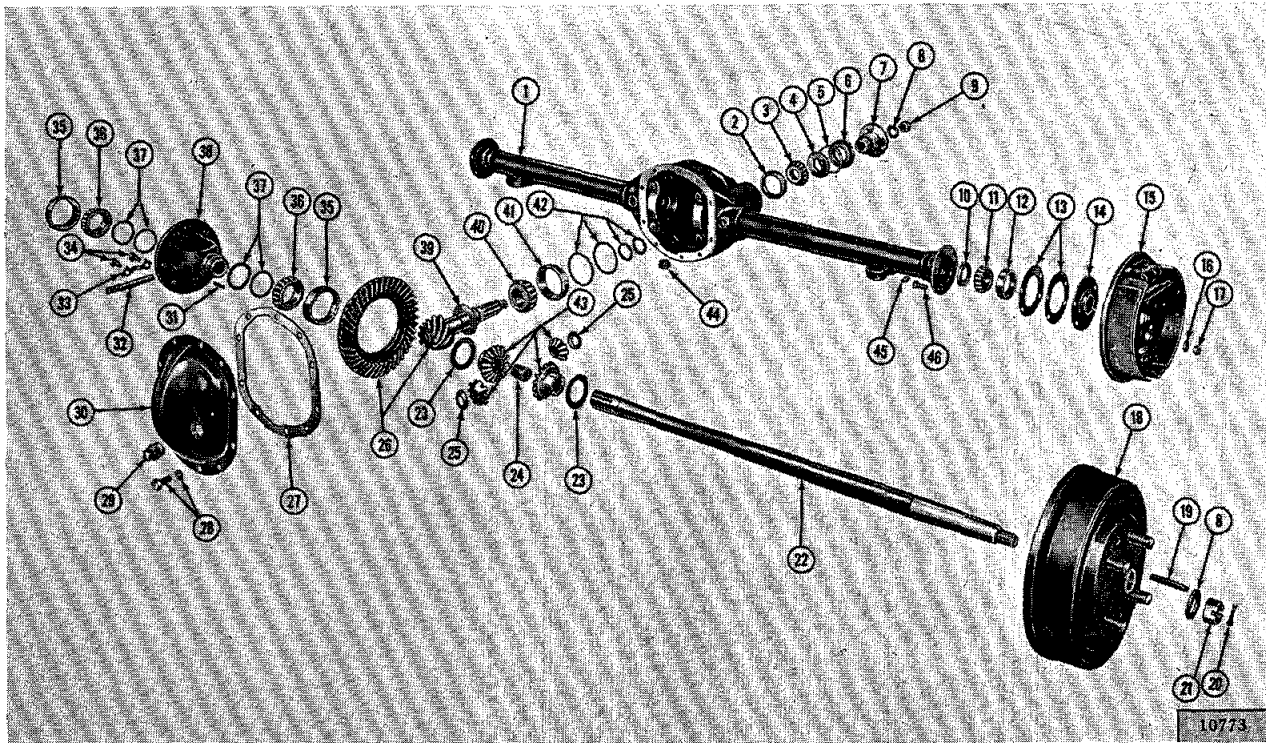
REAR AXLE (DJ5) (CJ6)
